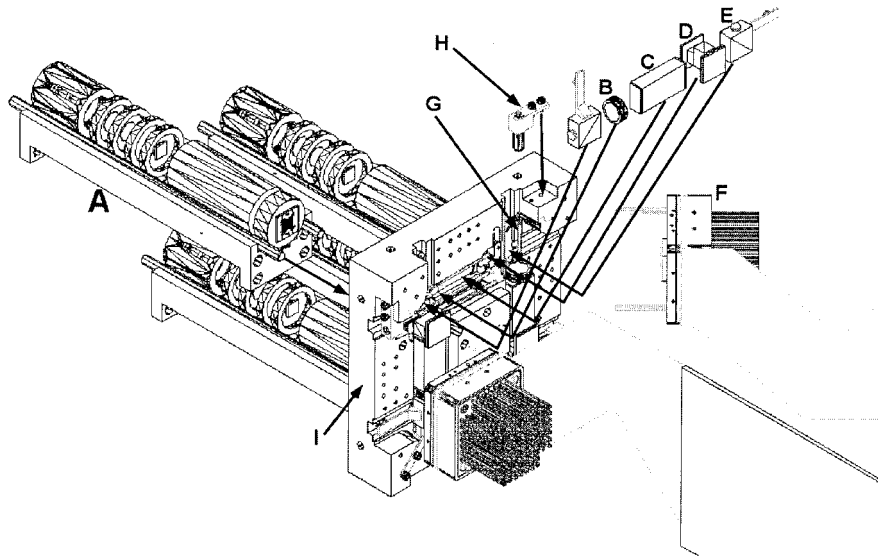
Drawing of an exploded three-dimensional view of backplane. A, optical power supply; B, Risley prisms; C, relay module; D, BCM; E, corner prism; F, OE-VLSI chip module; G, hardened steel rod; H, adjustment screw; and I, baseplate.
